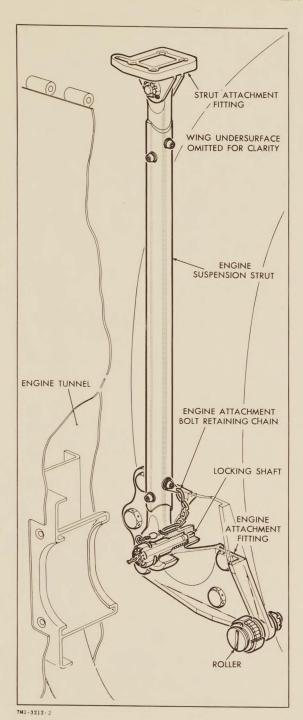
ENGINE SUSPENSION - FRONT OUTBOARD
